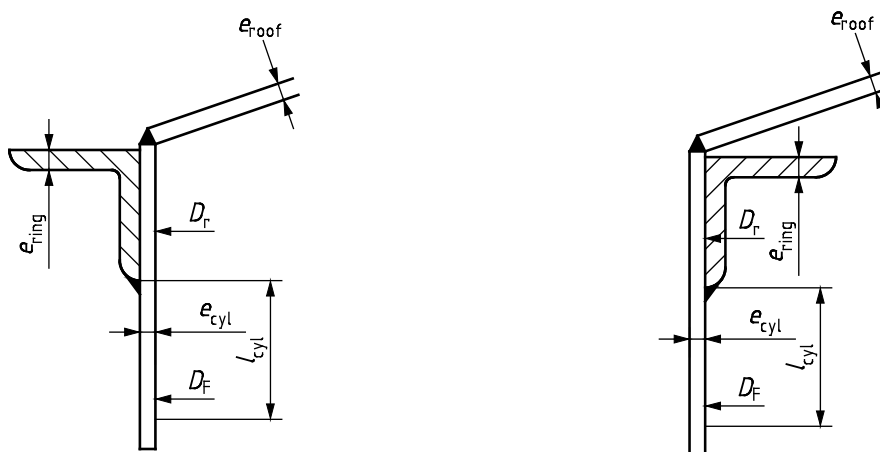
Roof to upper course junctions: roof welded to ring
